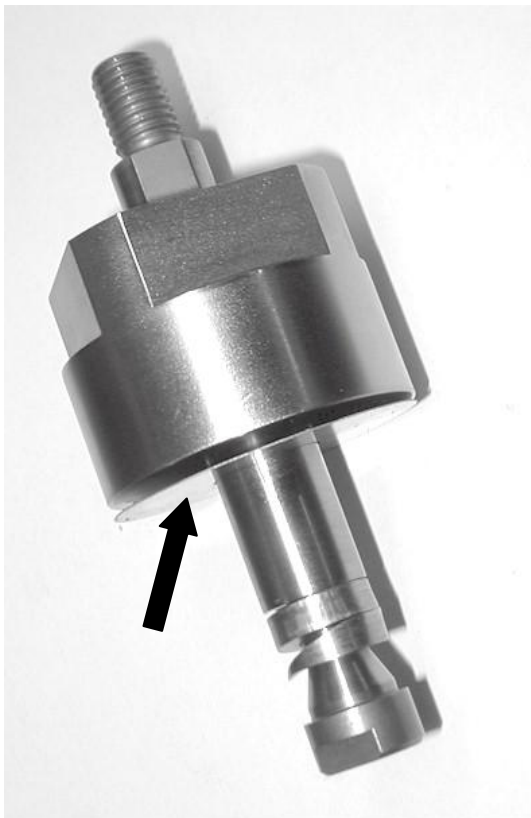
The sliding disc (arrow) is mounted the neck of the press part. Remember to oil the face of the sliding disc resting against the nut with Capo oil.
